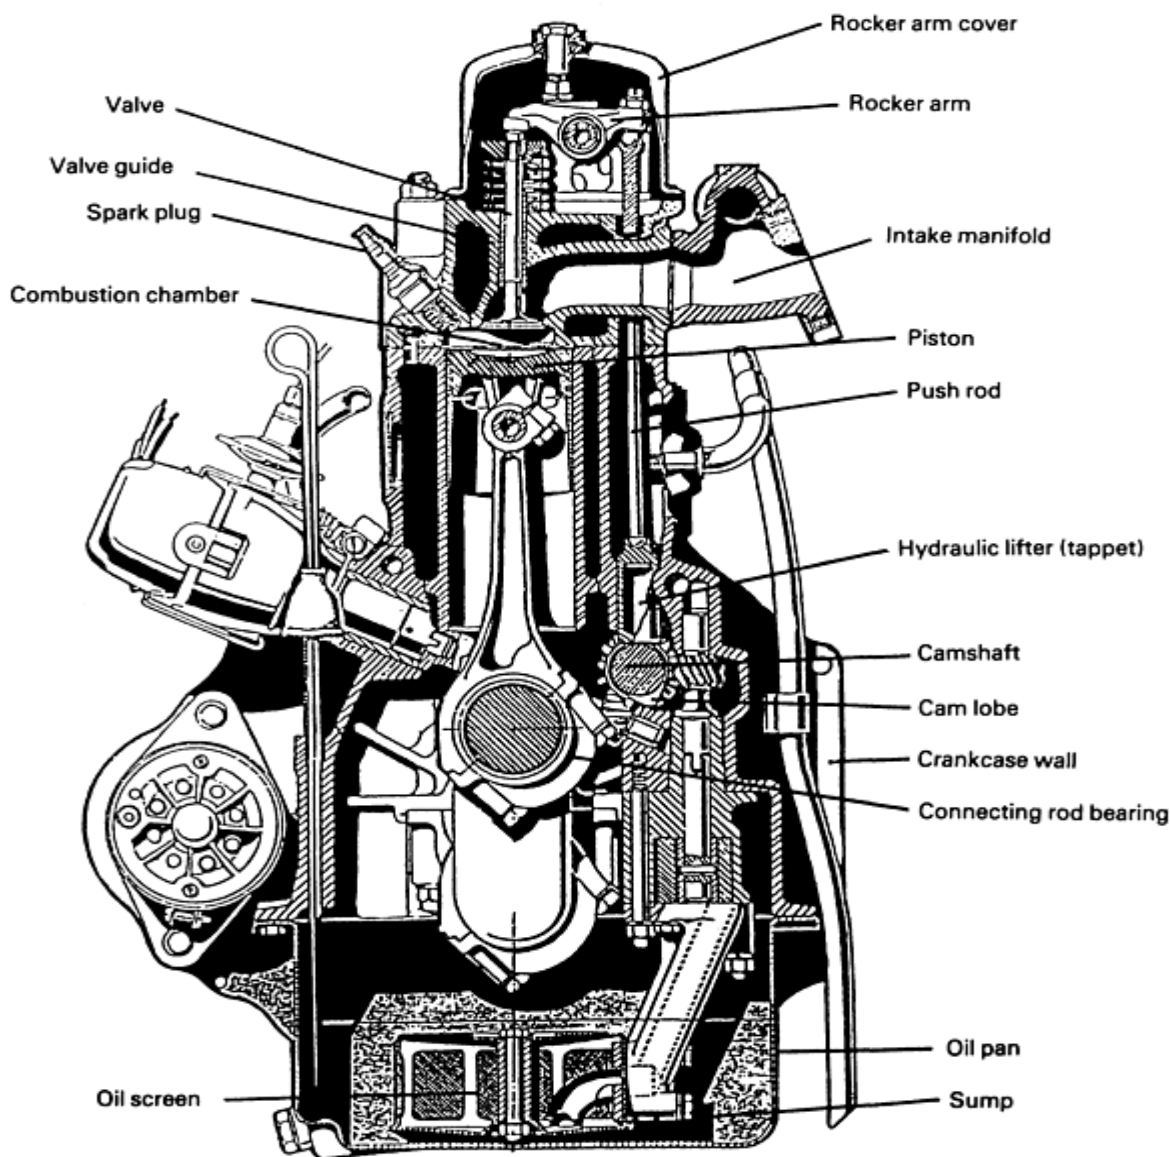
Cross section of a six-cylinder, in-line automotive engine. Courtesy of S.Q.A. Rizvi, Lubrizol Corporation
